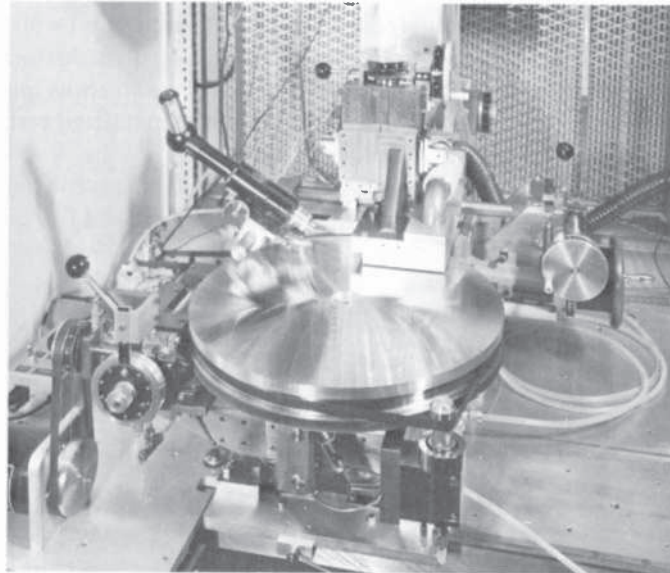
Modified jig bore with hydrostatic turntable used for master substrate machining.
